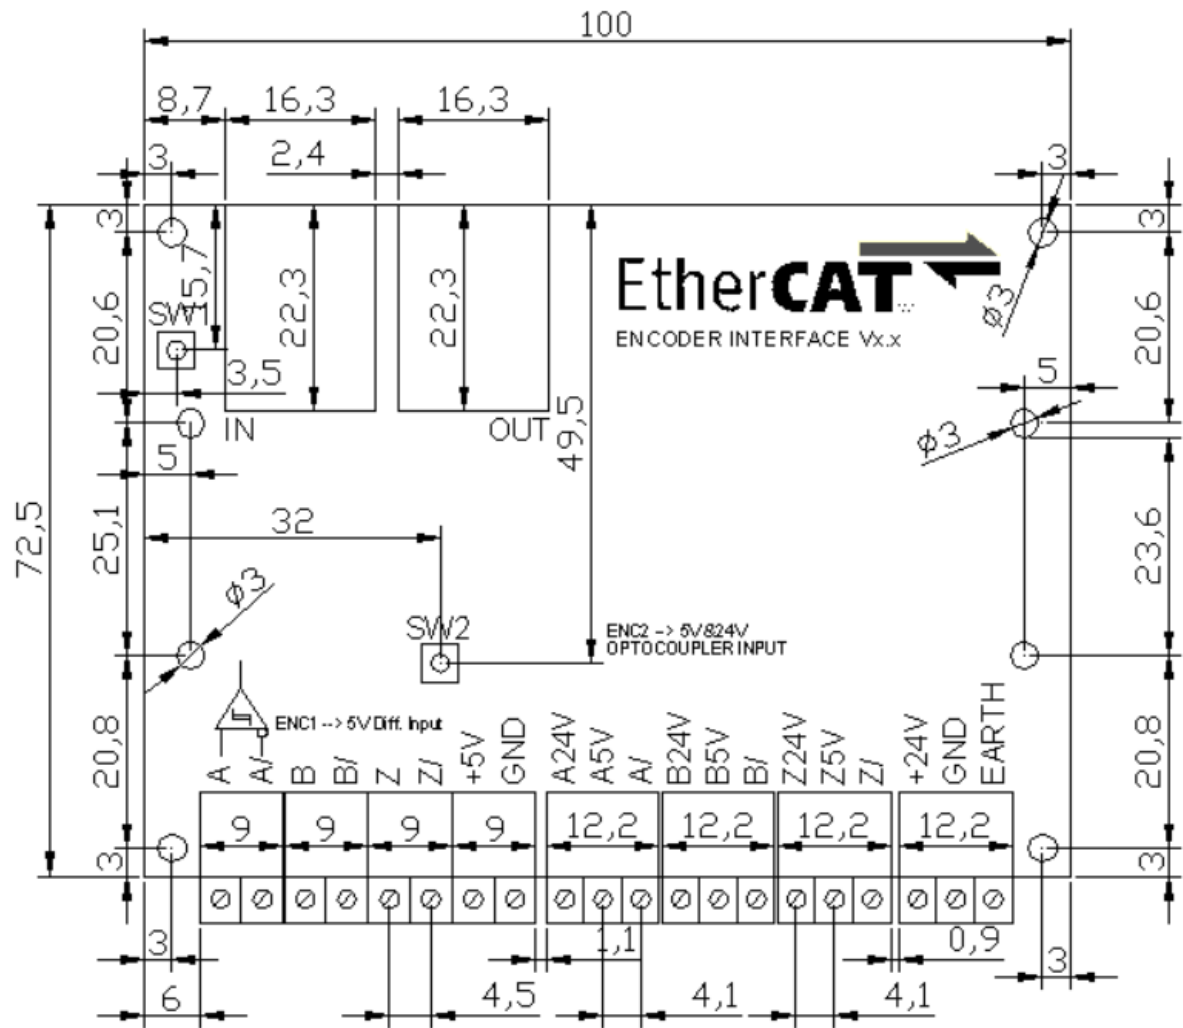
Outline dimensions in mm (all tolerances : $\pm 0.5\text{mm}$)
